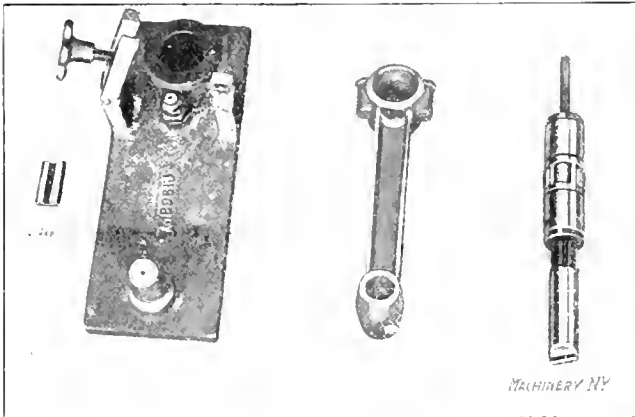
Rolling Tool and Chuck for Sizing Bronze Connecting-rod Bushings
